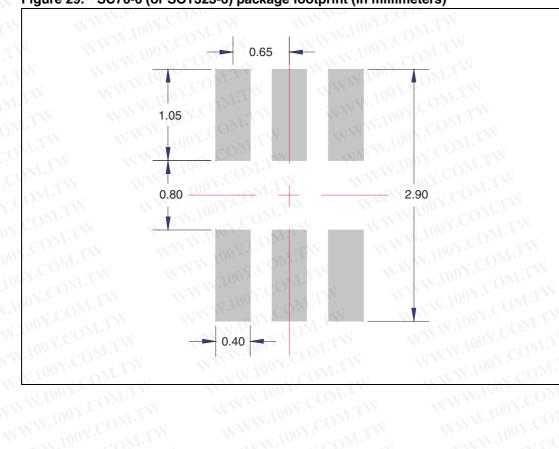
SC70-6 (or SOT323-6) package footprint (in millimeters)
